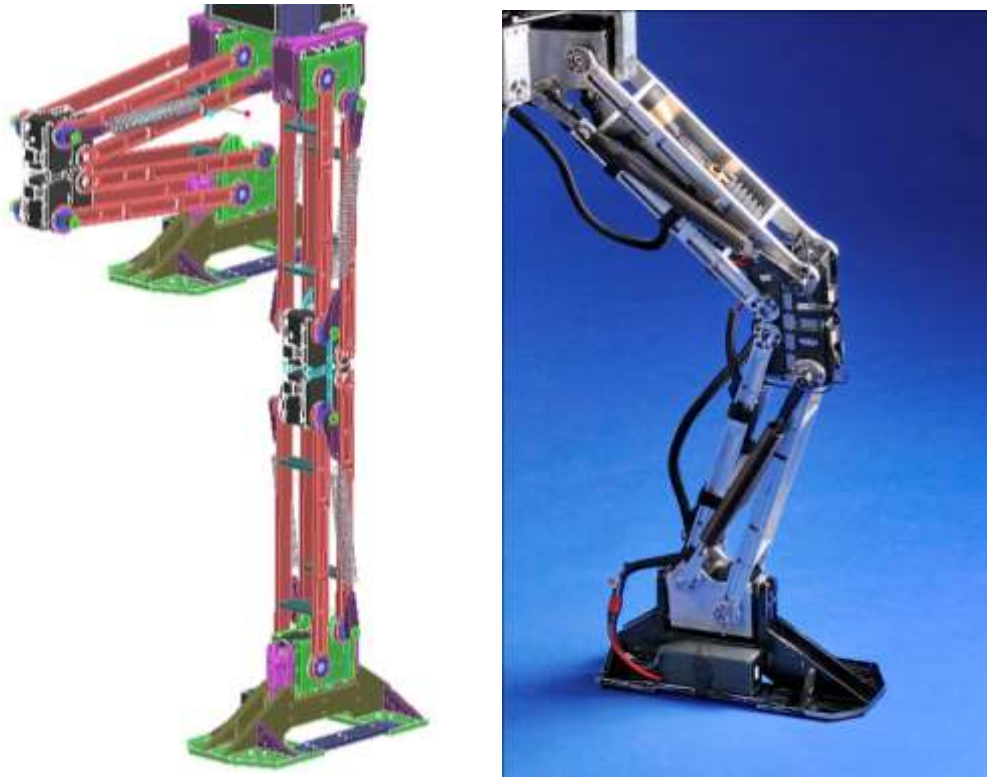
CHARLI-L's leg (left: 3D CAD model, right: real assembled part)
